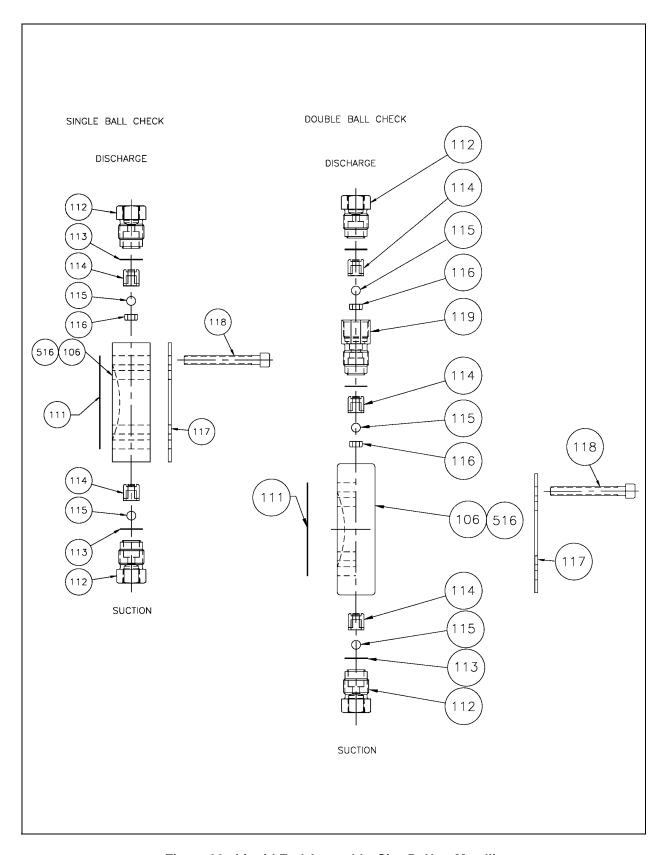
Liquid End Assembly, Size B, Non-Metallic.
